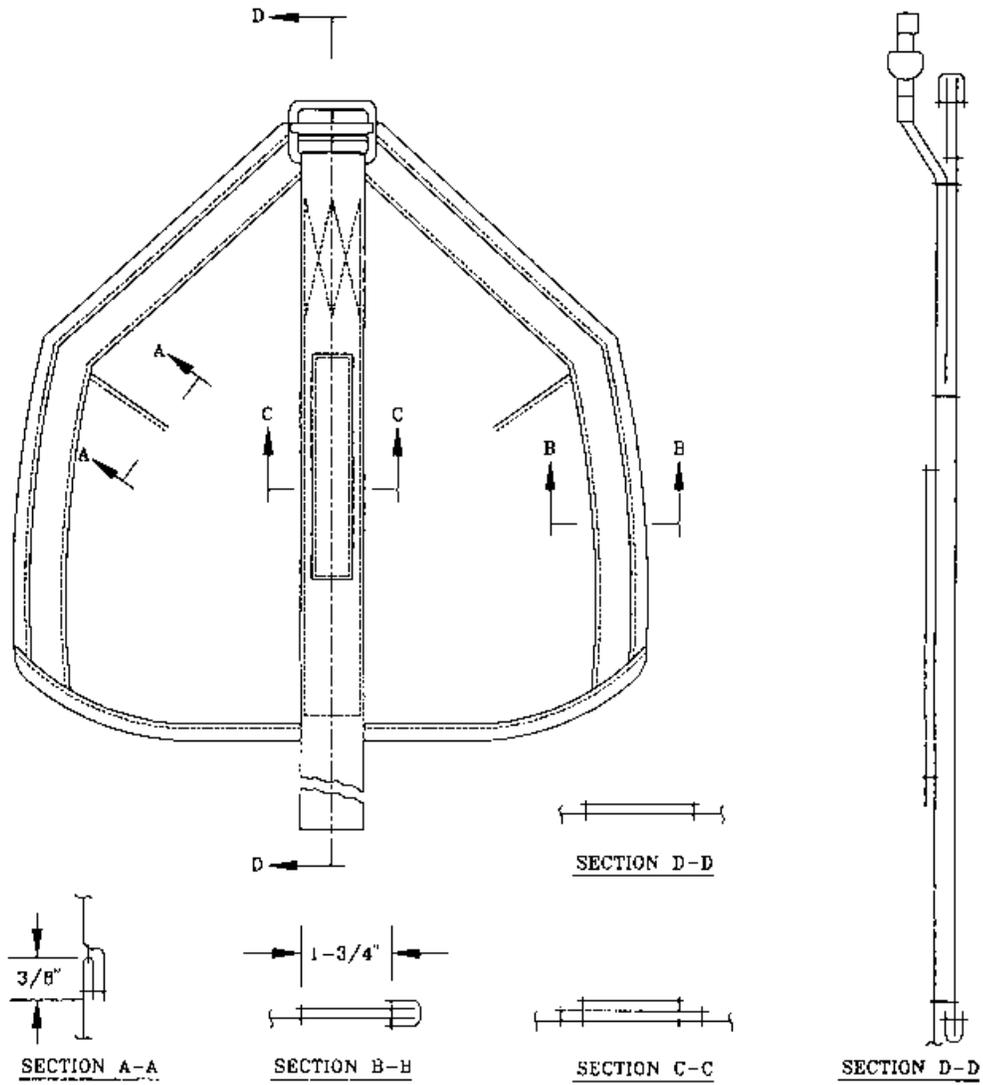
(CONTAINER SIDE MOUNTED) LOWER CAP ASSEMBLY (SHEET 2 OF 2)
